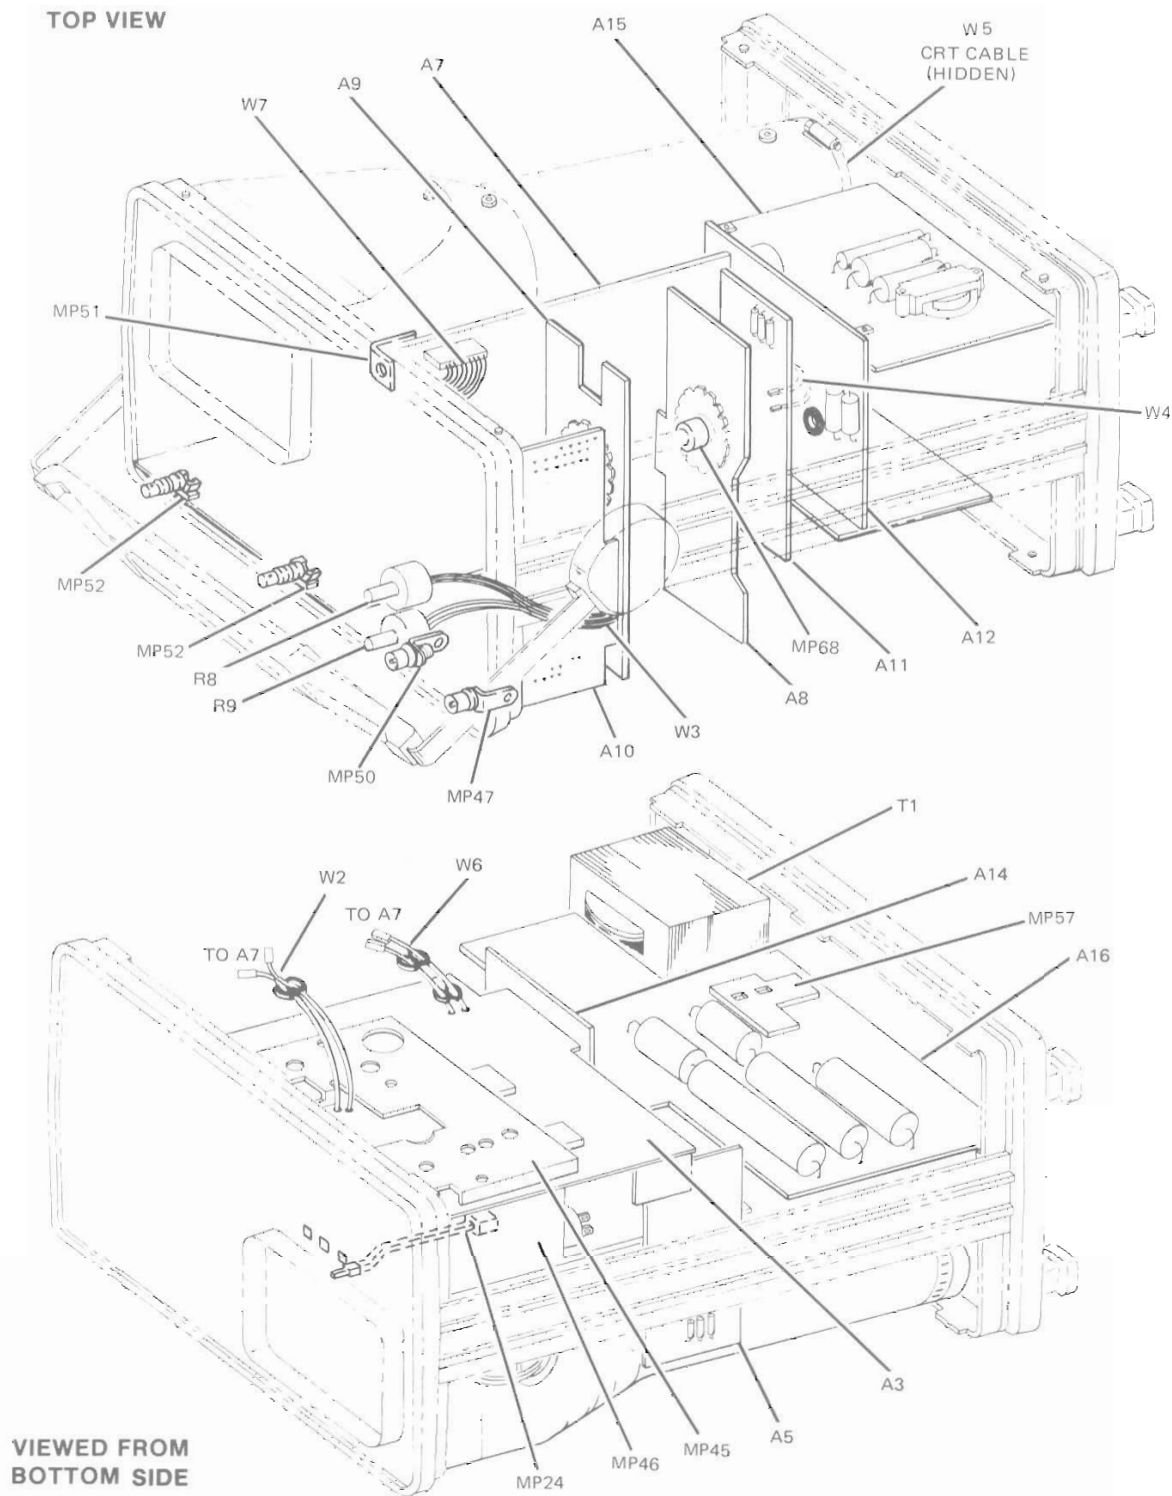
Chassis Parts and Board Assy Identification (Sheet 2 of 2)
